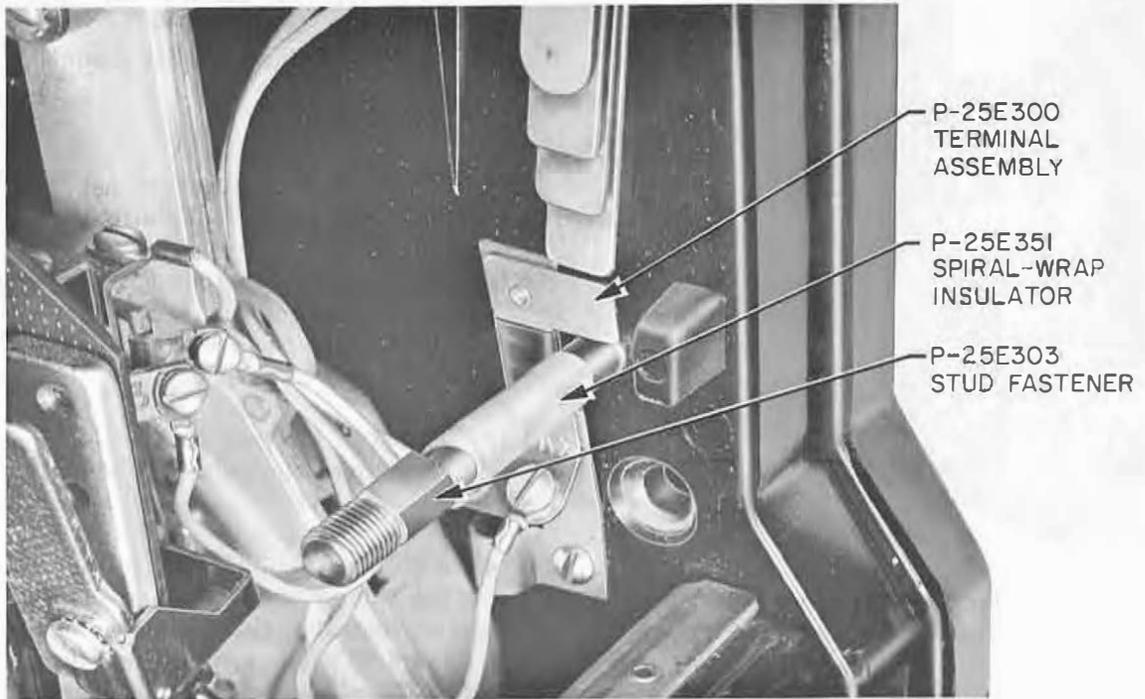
Terminal Assembly, Insulator, and Stud Fastener
